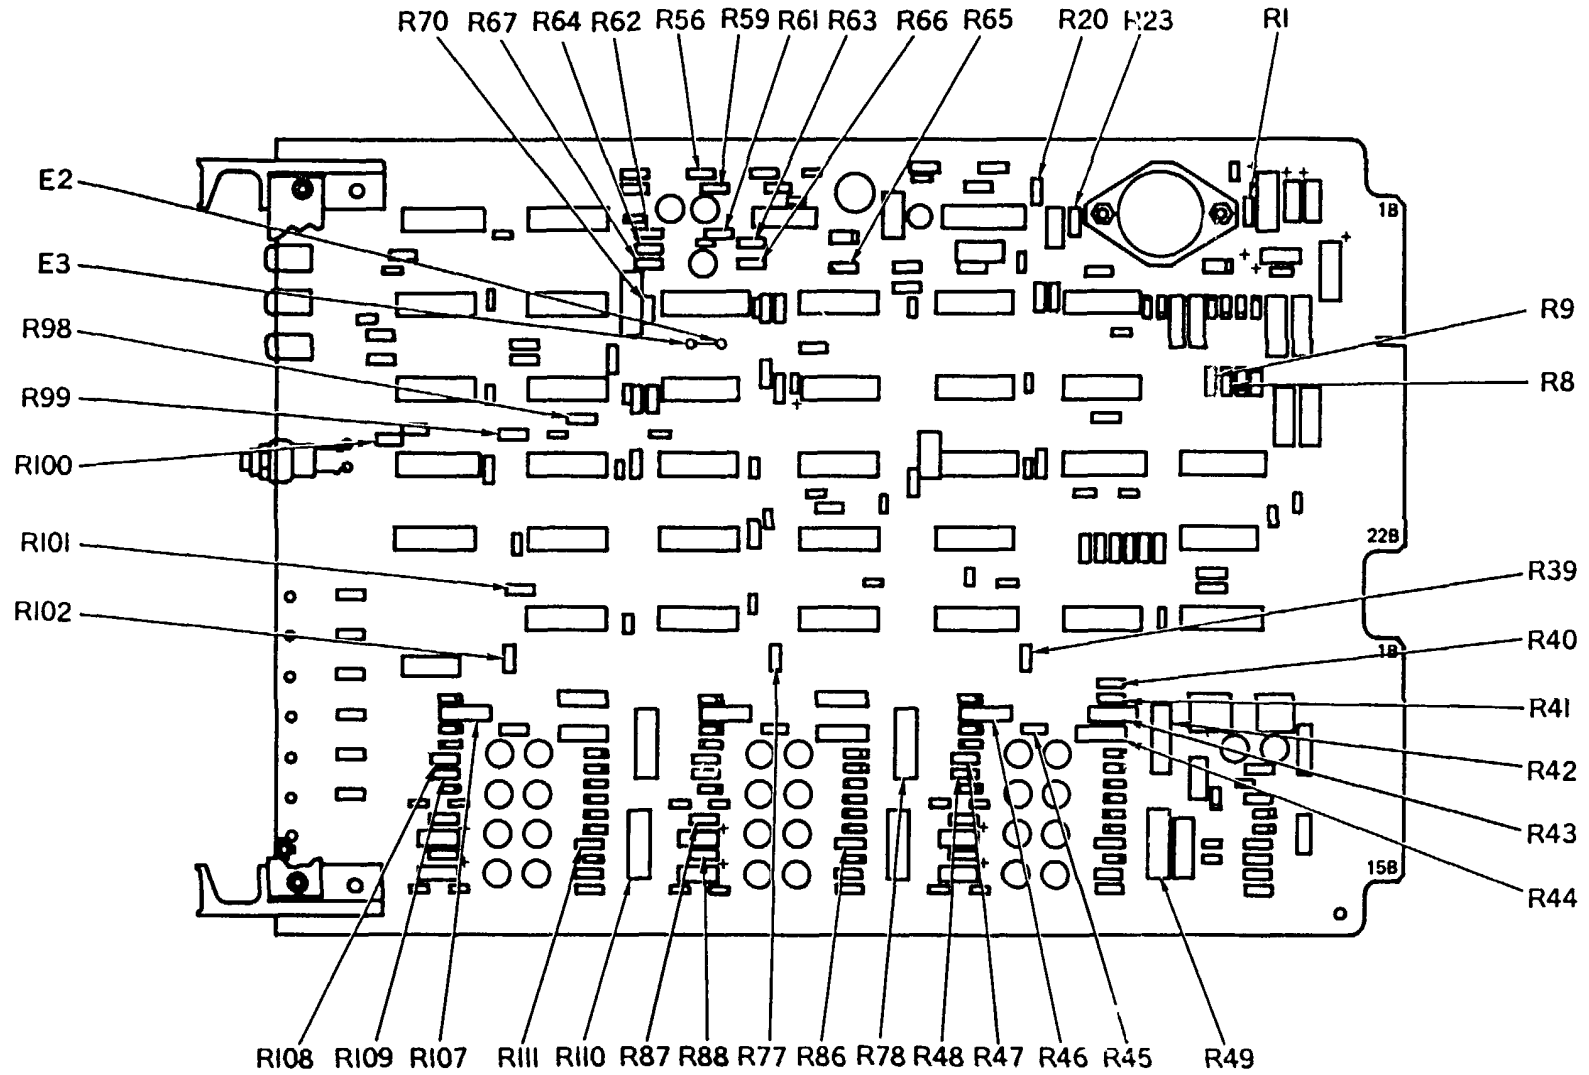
DRIVER unit parts location diagram (sheet 10 of 14) DVR04.
